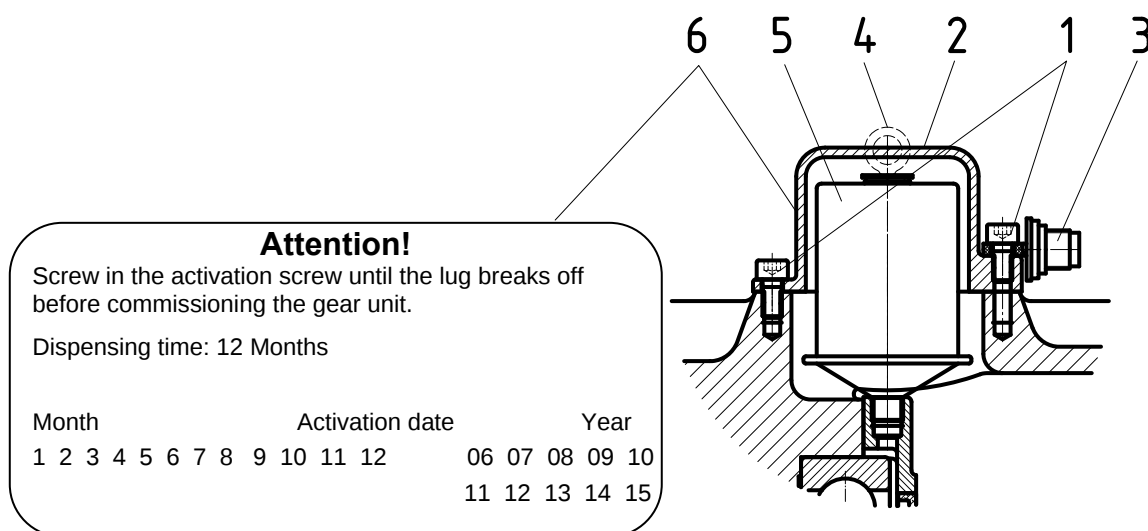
Activating the automatic lubricant dispenser with standard motor mounting
